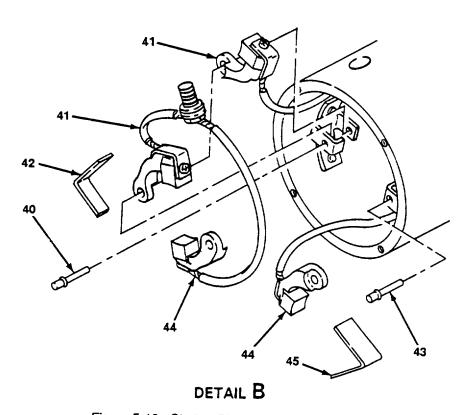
Starter, Disassemble (Sheet 2 of 2).
